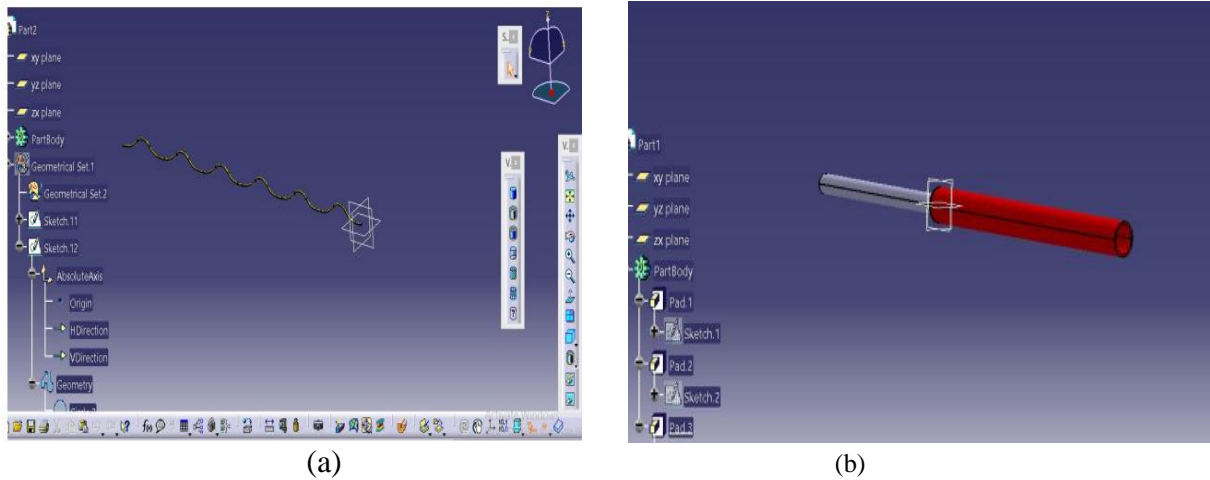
Tubes details (a) Serpentine tube longitudinal view (b) Pipe and outer casing
